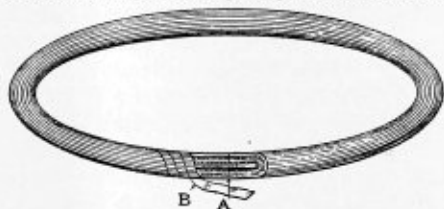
GASKET SHOWING JOINT MADE WITH TAPE.
